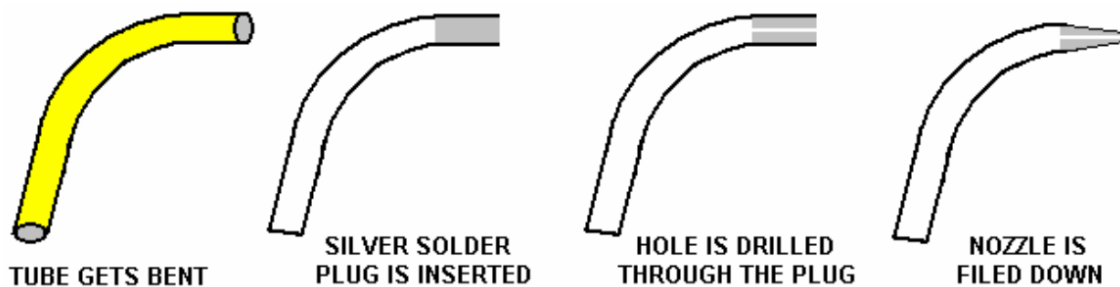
The end of the copper pipe which will form the nozzle, is filled with silver solder and the end filed flat.
